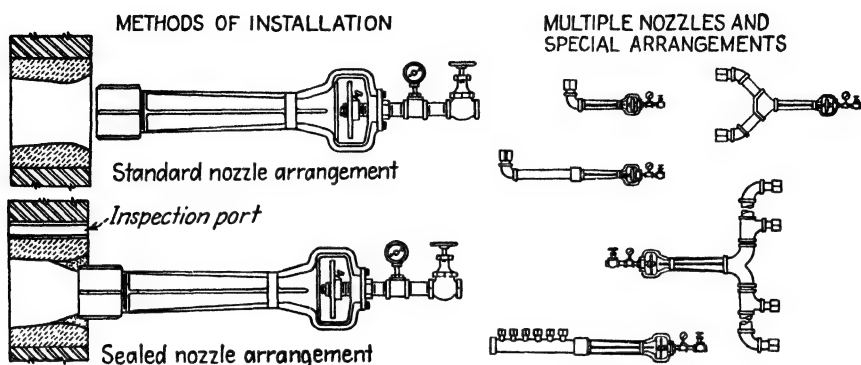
Mountings and arrangements of large-port burners. (Courtesy of Webster Engineering Company.)
